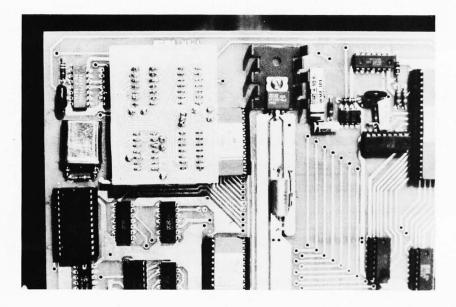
A view of the slow memory interface board installed in position on the Southwest Technical Products 6800 MPU board.
